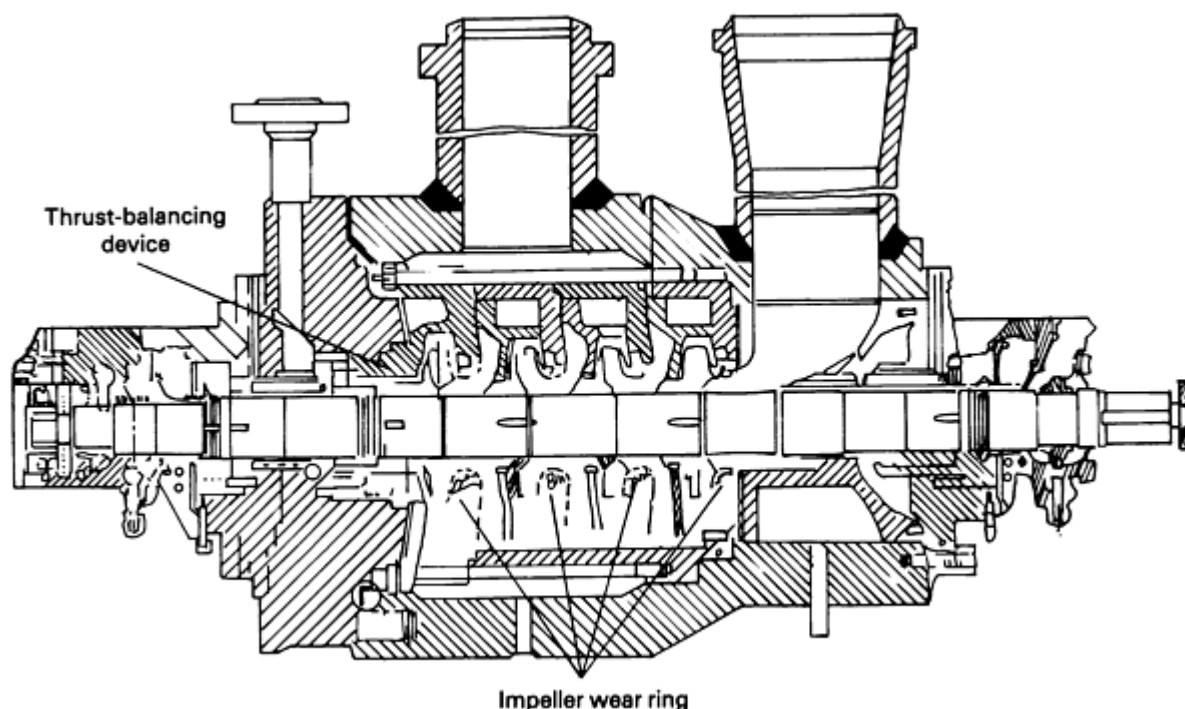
Cross-sectional view of a multistage pump showing wear-prone components. Courtesy of Dresser Pump Division, Dresser Industries
